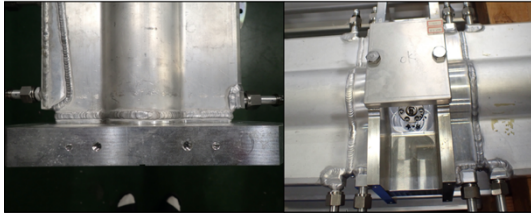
Welding part at a flange (left) and a BPM-block (right) in an aluminum alloy beam-pipe with antechambers.
